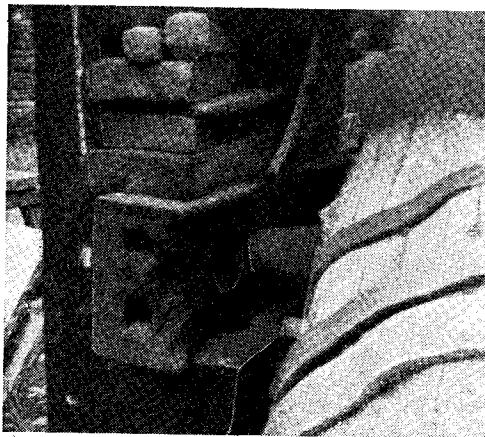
Bearing and pivot of one of the tail-helves. Note the assorted packing to hold the bearing in place
